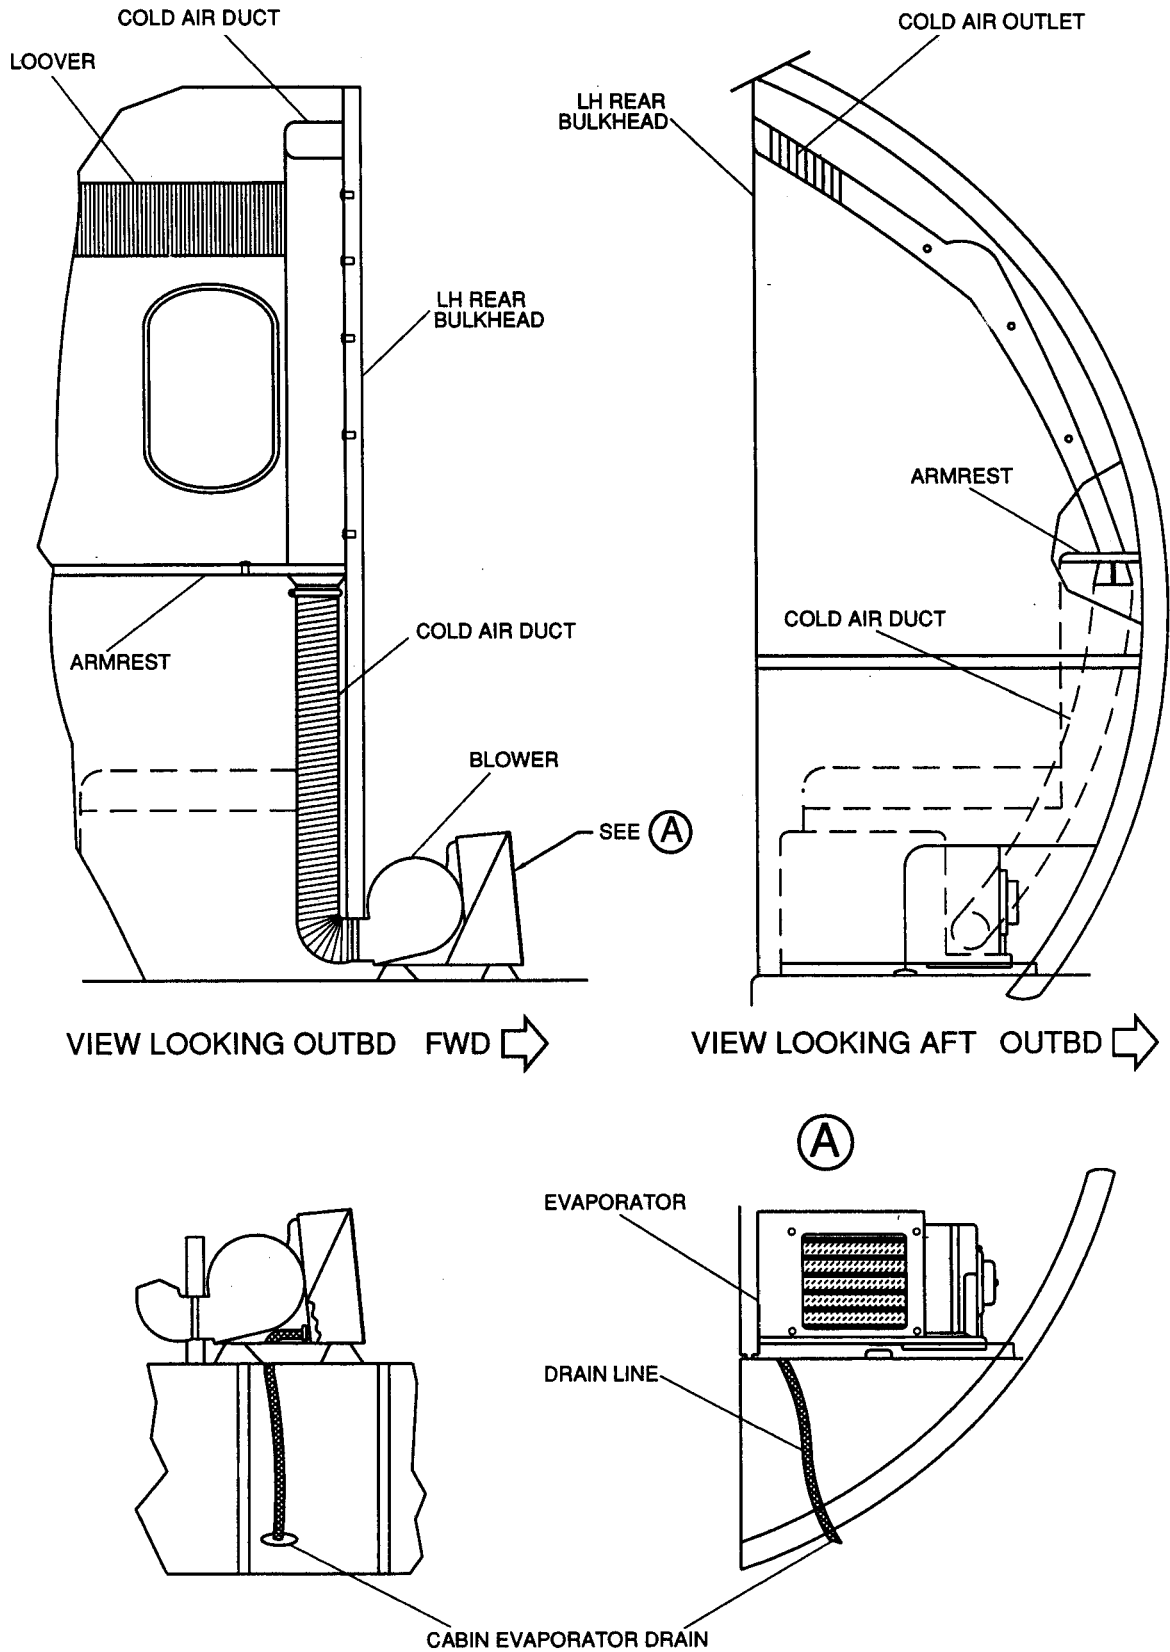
Passenger Compartment Blower and Evaporator - Removal/Installation (Sheet 1 of 2)
